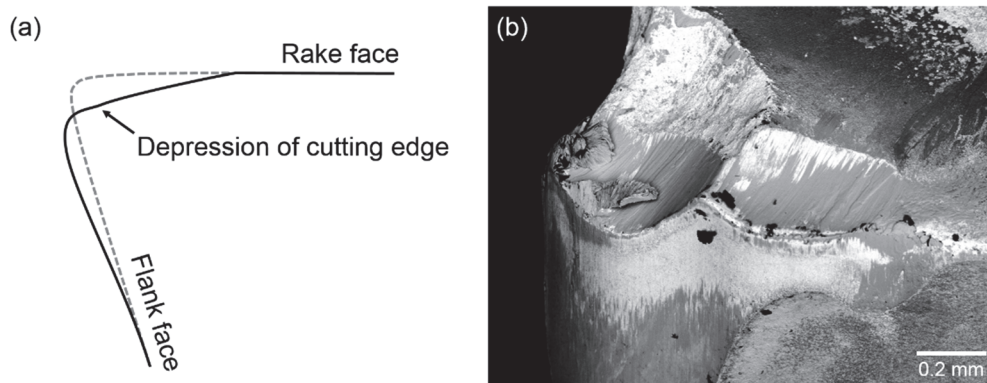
Examples of (a) depression of the cutting edge by gross plastic deformation, and (b) a cutting tool which failed by fracture.
